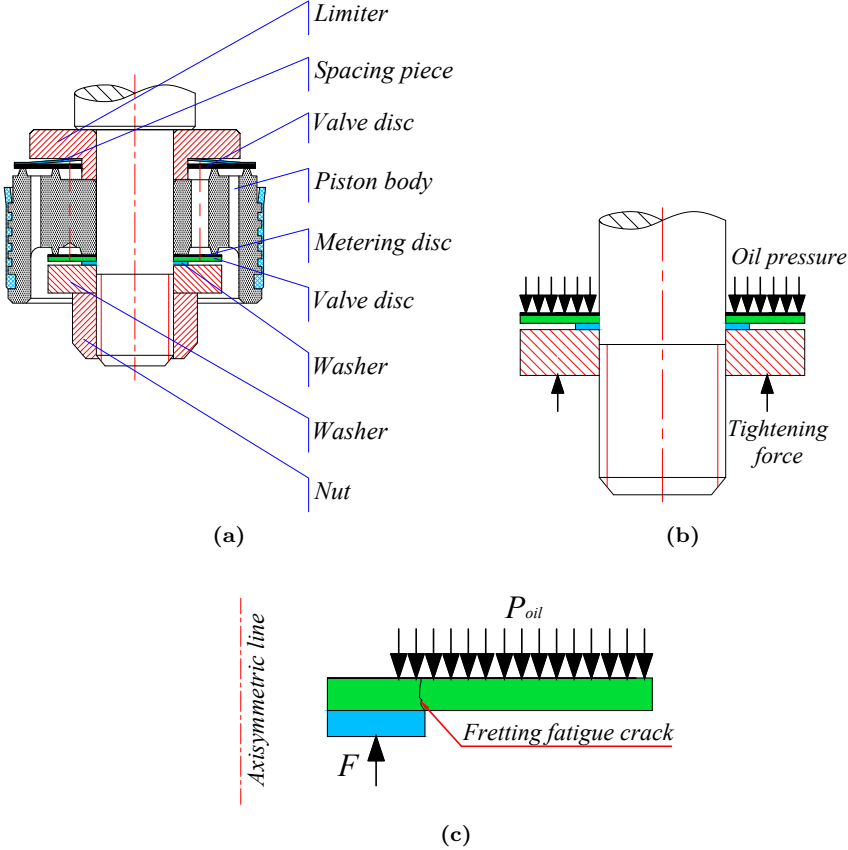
(a) detailed view of piston valve, (b) schematic view of oil pressure over valve disc and (c) schematic view of fretting fatigue failure loading and boundary conditions.
